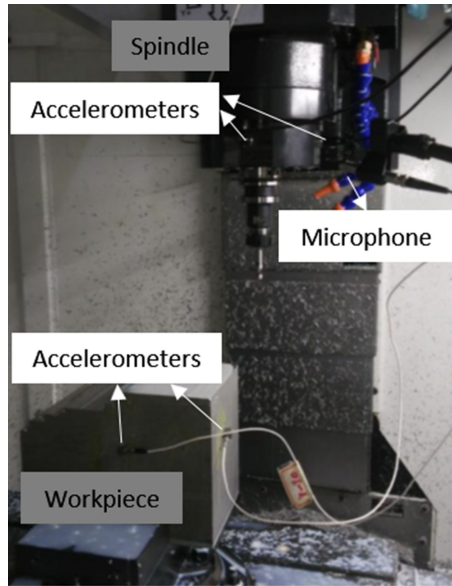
Arrangement of five sensors in a CNC milling machine.
